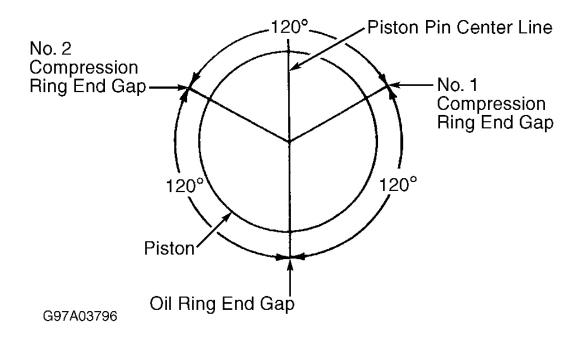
Positioning Piston Rings Courtesy of FORD MOTOR CO.
